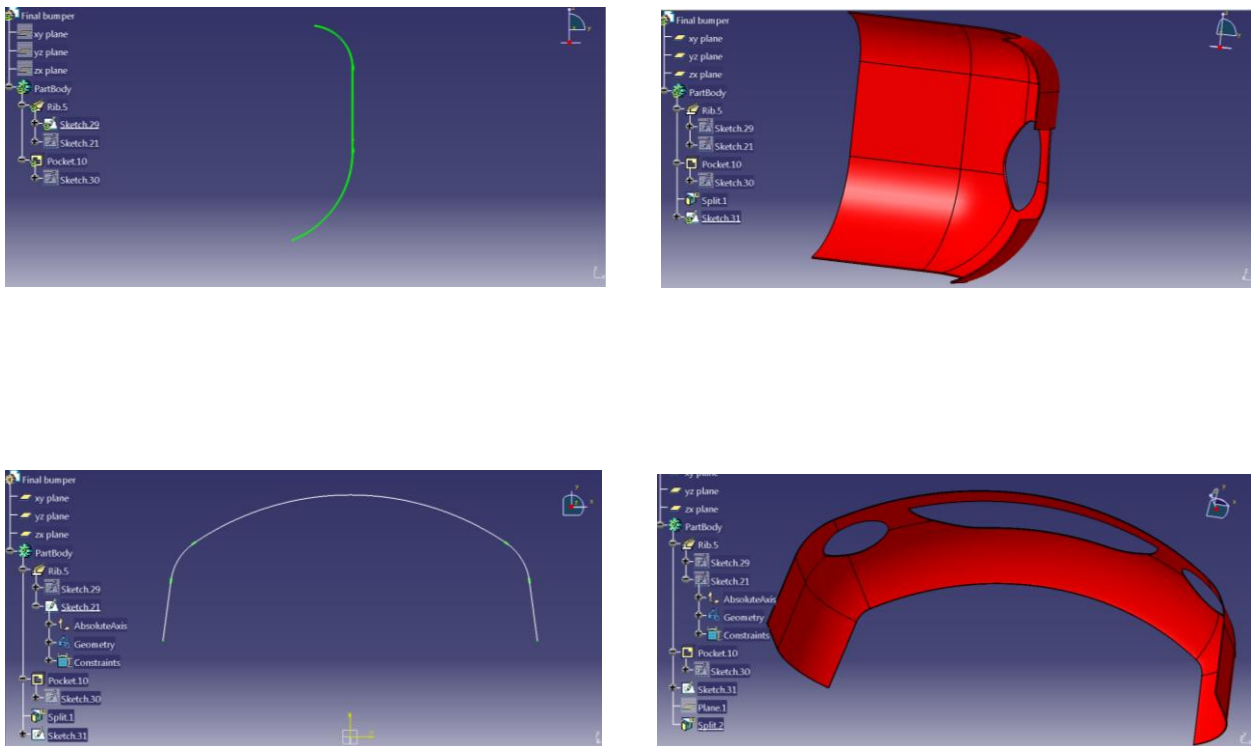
Cross section view of the bumper modeled in CATIA V5
